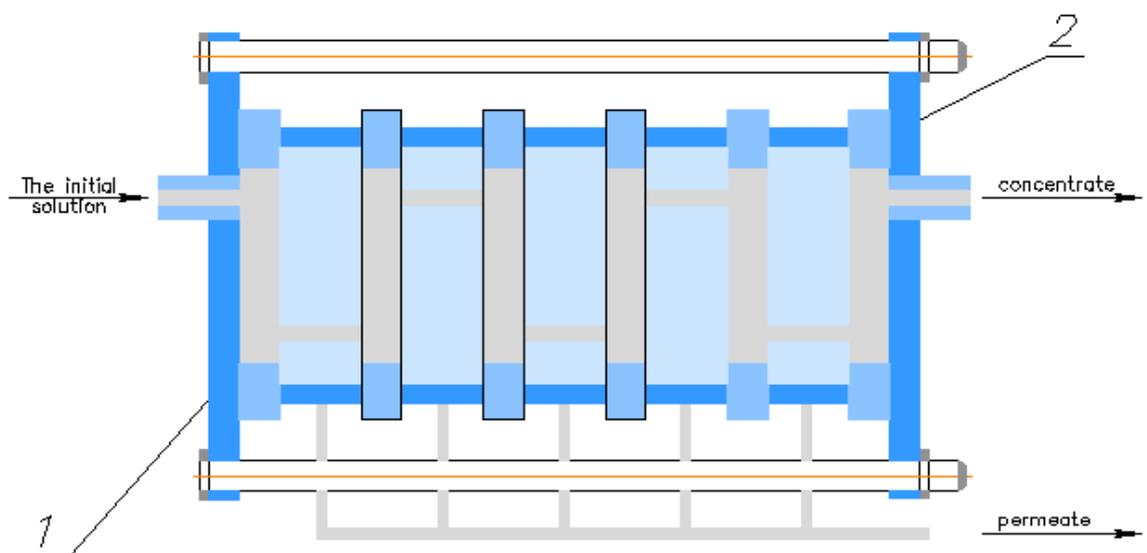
A flat-chamber multi-section apparatus of the "filter press" type (1 — membrane; 2 — drainage material)
